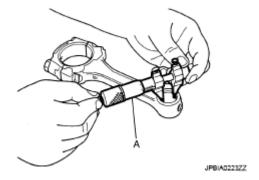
Measuring Inner Diameter Of Connecting Rod Bushing Using Inside Micrometer Courtesy of NISSAN MOTOR CO., U.S.A.
